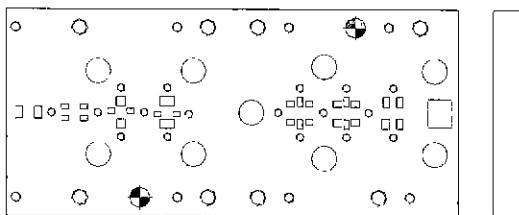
A drawing of the punch plate of internal leads generated in the die layout module
